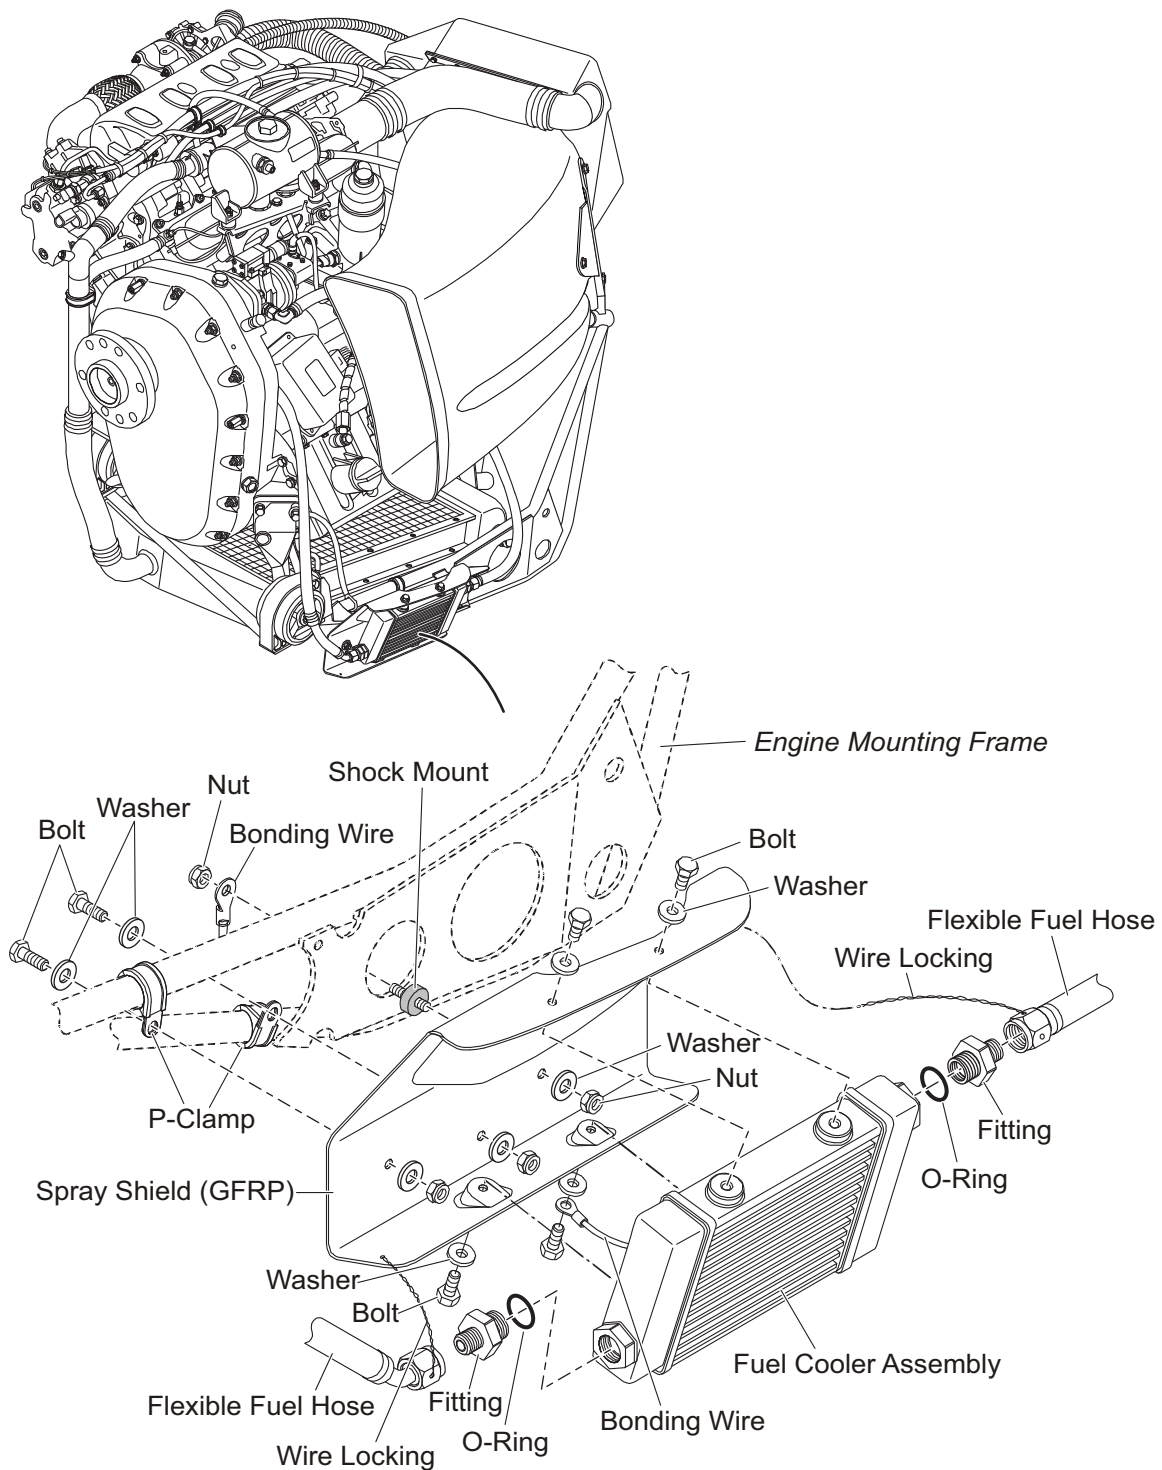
Fuel Cooler - Removal/Installation (if OÄM 62-060 is installed)
